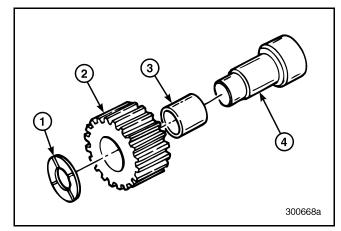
Exploded View of Reverse Idler Gear Assembly
